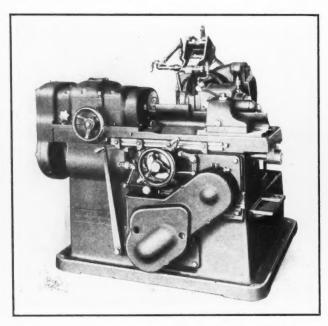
Pratt & Whitney Automatic Machine for grinding Automotive Steering and Driving Worms, etc.
